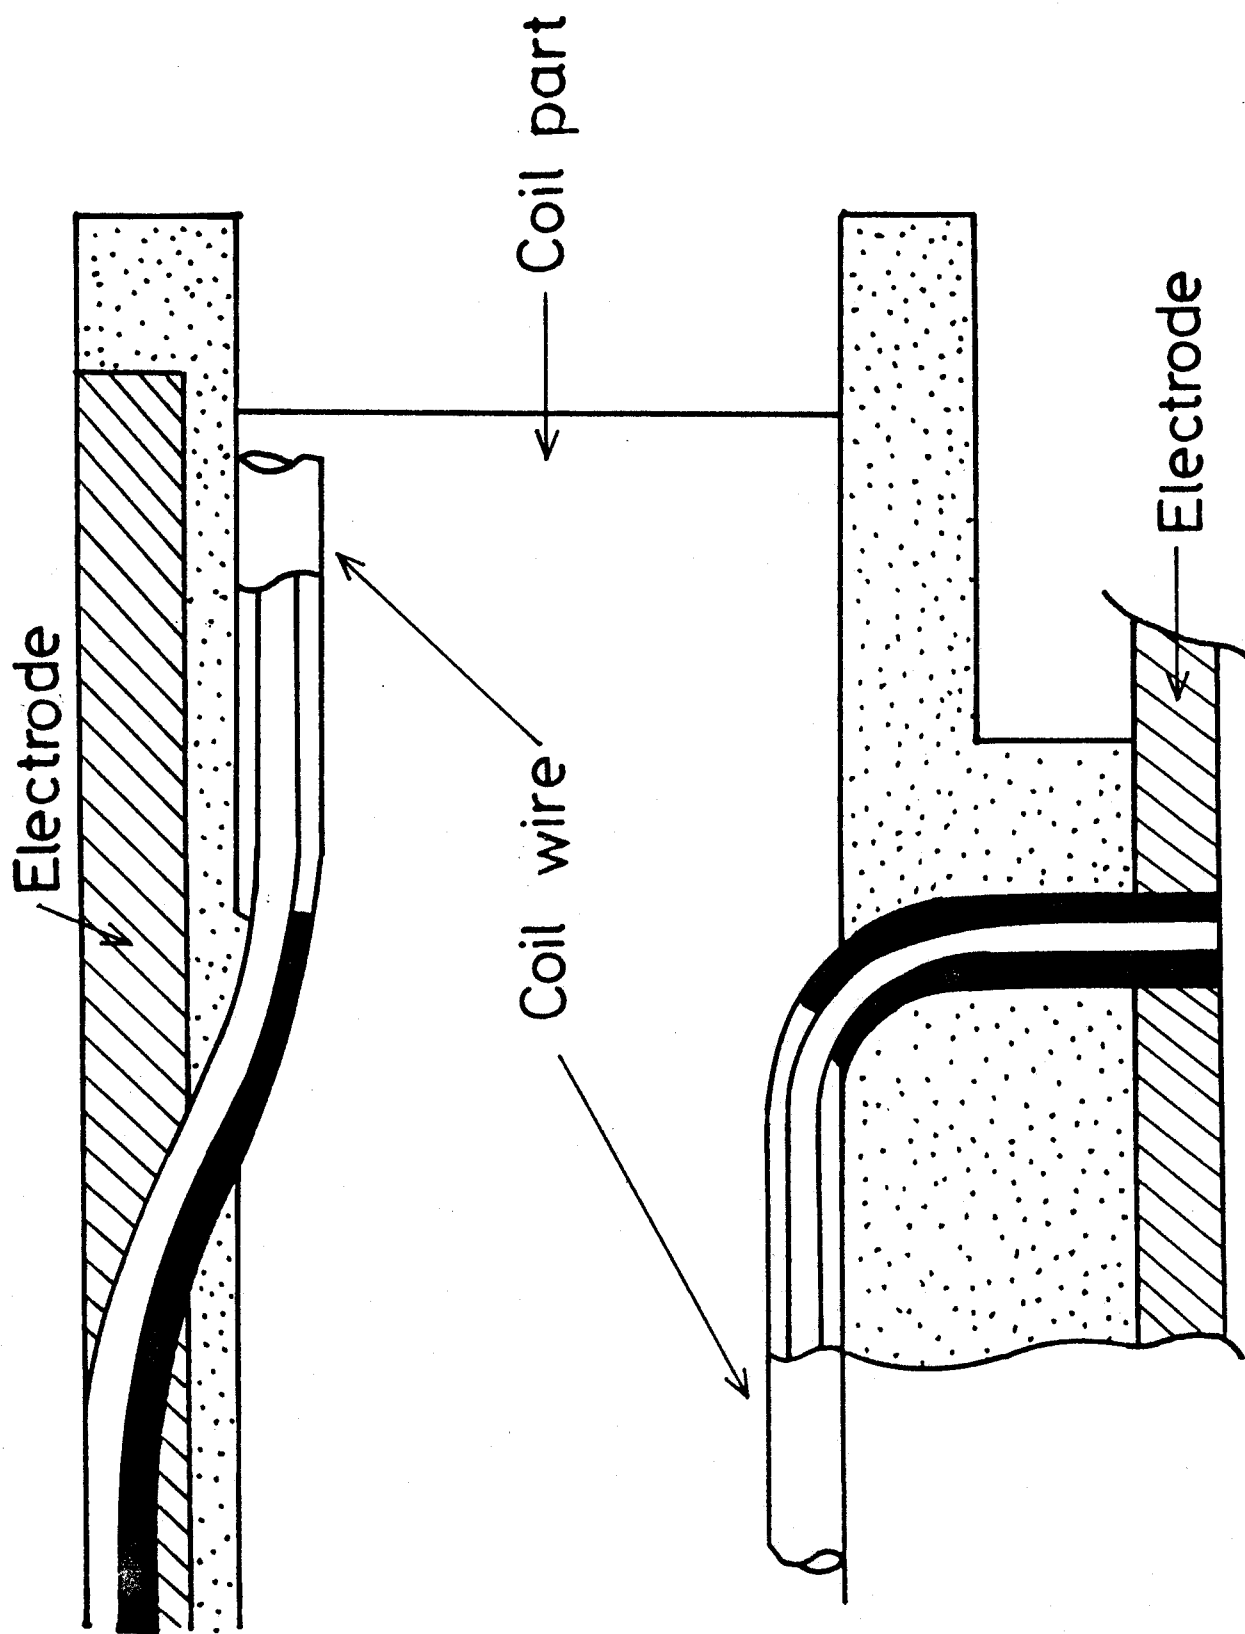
Coil windings and coil-end holding. Black parts show supporting chips for cable wires. These are welded with wires and electrodes.
